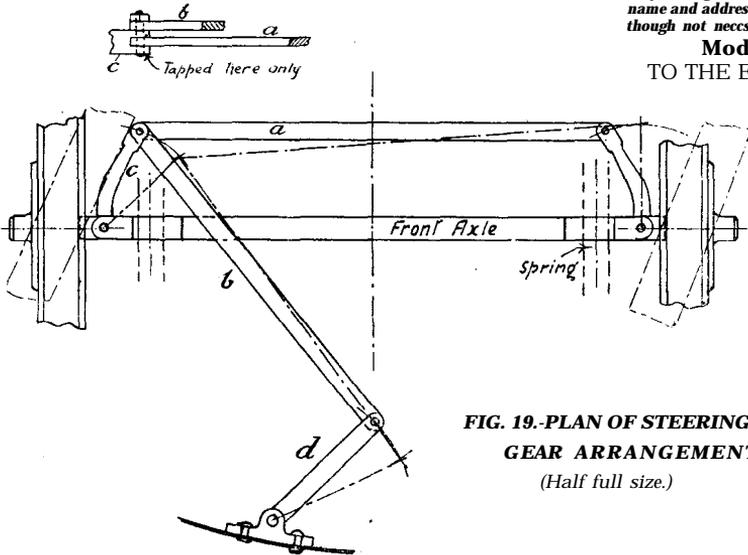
PLAN OF STEERING GEAR ARRANGEMENT. (Half full size.)
